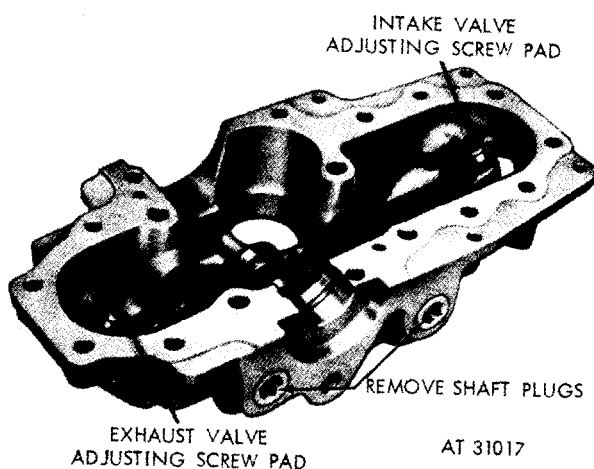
Removing or installing valve rocker arm shaft plugs.
